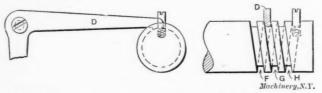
Ingenious Automatic Trip for Drive of Chamfering Machines.
